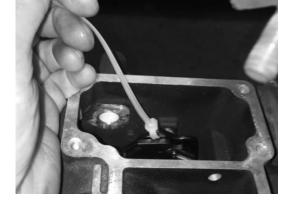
| LEAVE THE ZIP TIE ON THE SHIFTER PAWL UNTIL AFTER THE GEARSET IS INSTALLED AND THE BOLTS ARE TORQUED
